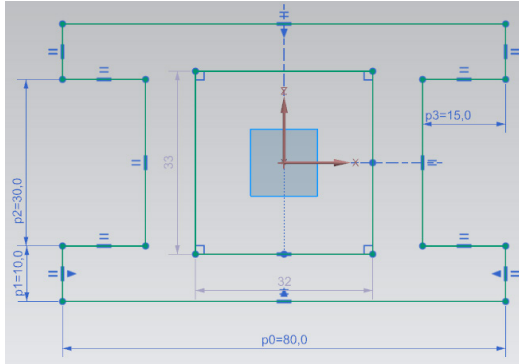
The sketch after drawing the inner loop and turning on the display of constraints
